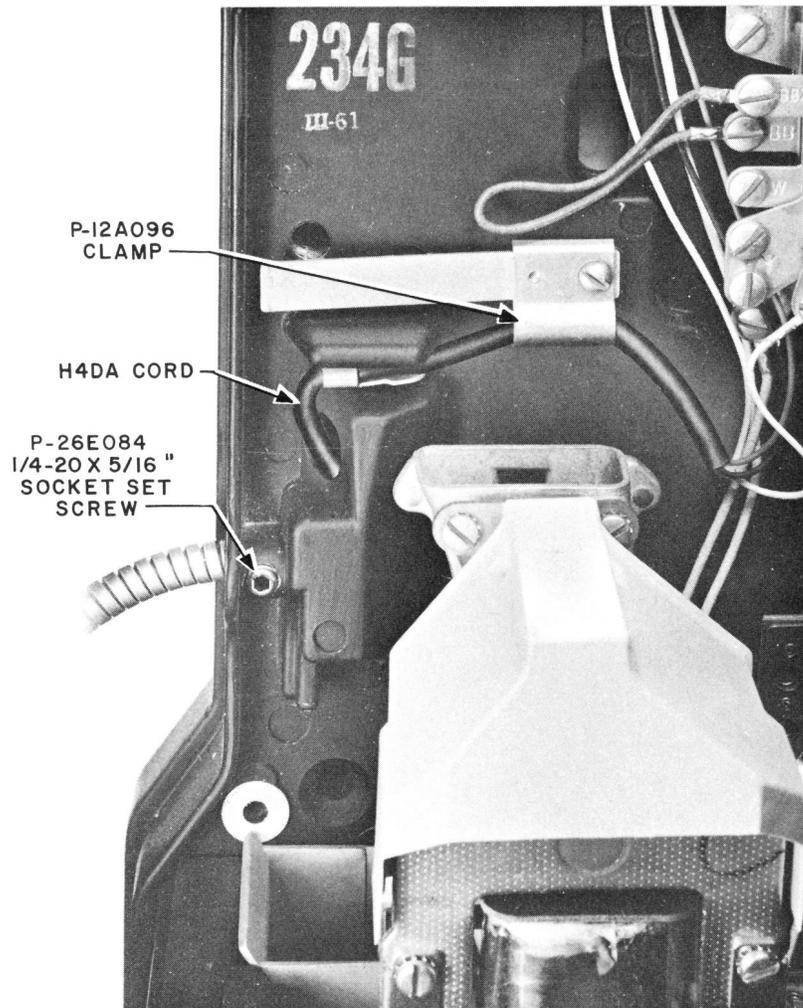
Fastening Cord of the G3R Hand Set to the Coin Collector Backplate
